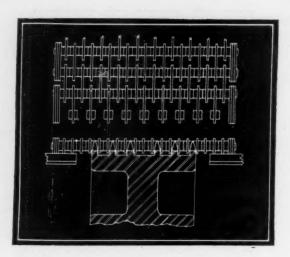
Sprocket is cut narrower than chain which is supported by steel tracks at sides
